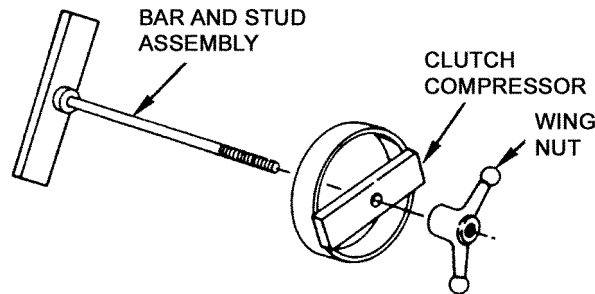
Bar and Stud Assembly and Compressor. (Repeated)
